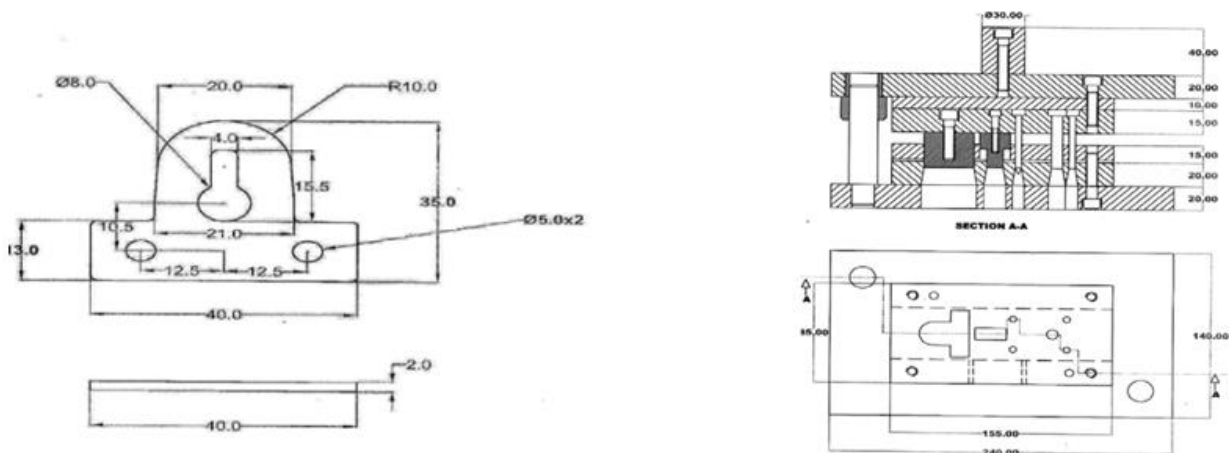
shows the Component drawing of the Photo frame Hook and the assembled view of the progressive tool designed in the AUTOCAD by author.
